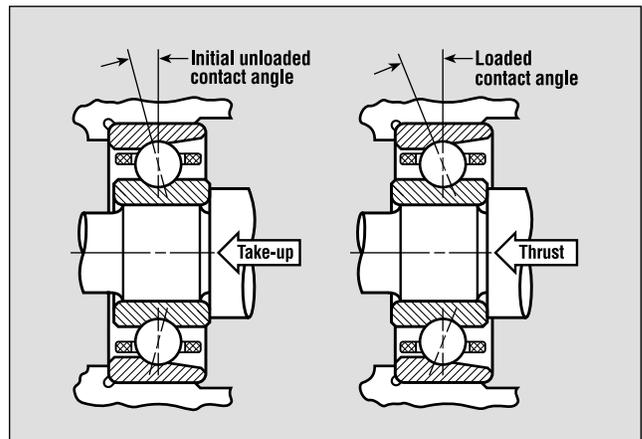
Contact angle refers to the nominal angle between the ball-to-race contact line and a plane through the ball centers, perpendicular to the bearing axis.
